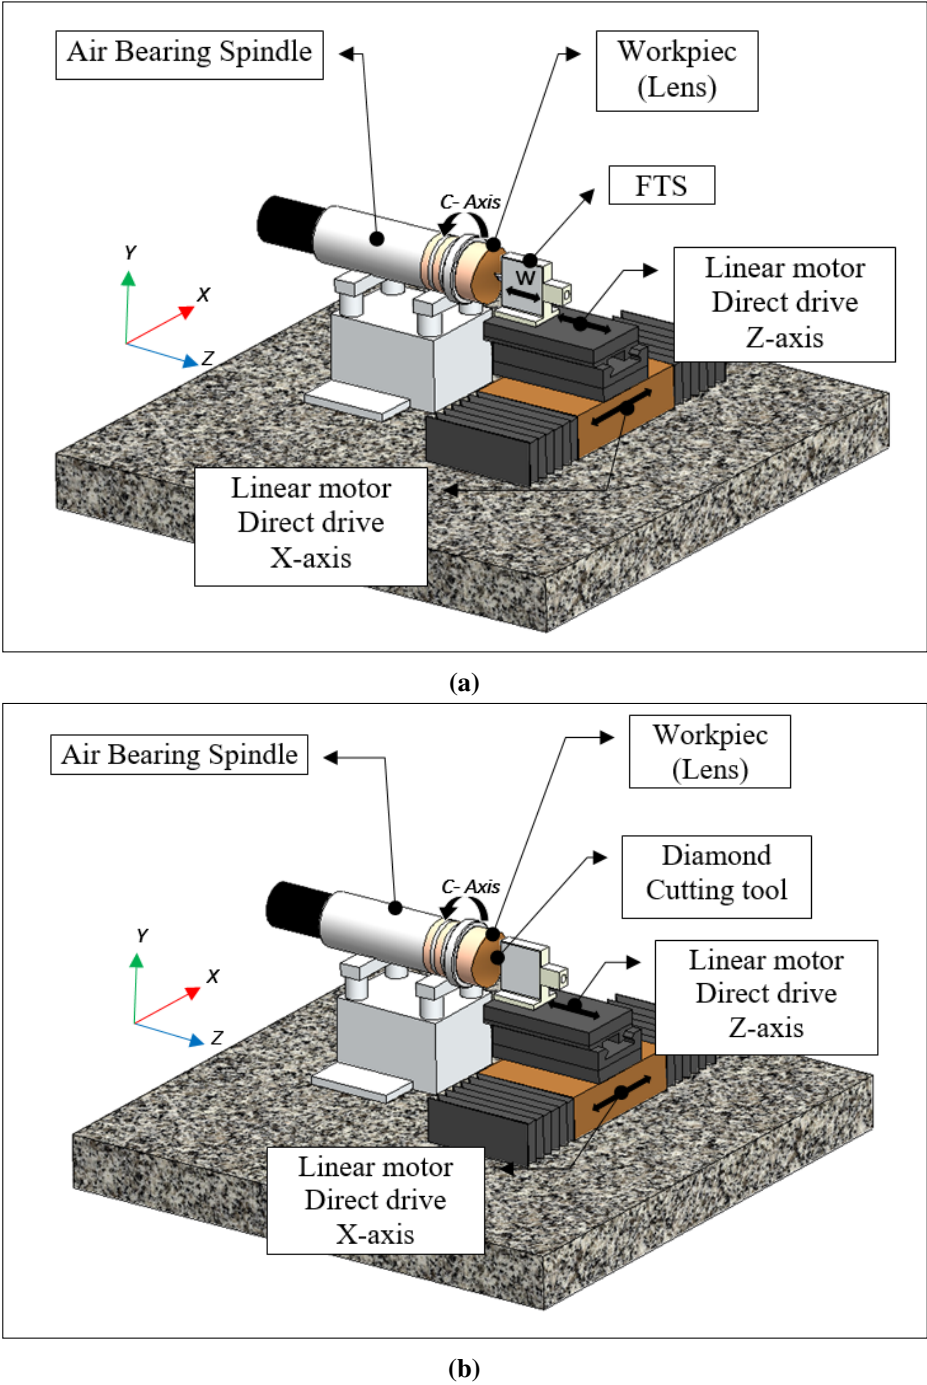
Ultraprecision diamond turning machine and machining configurations: (a) fast tool servo mode; (b) slow tool servo mode
